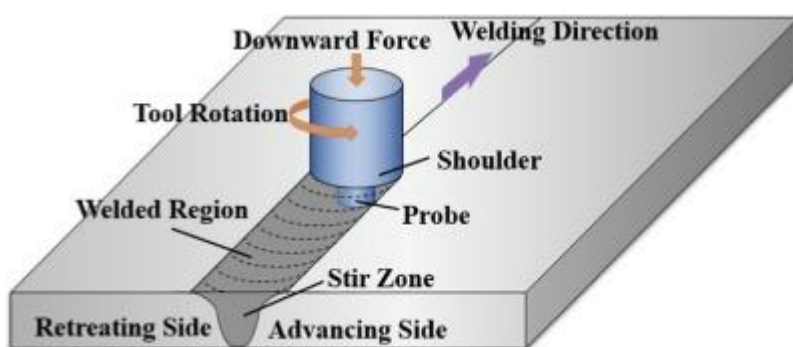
Schematic of basic version of Friction stir welding. Image reproduced with permission from [13]. © 2024 Elsevier Ltd.
